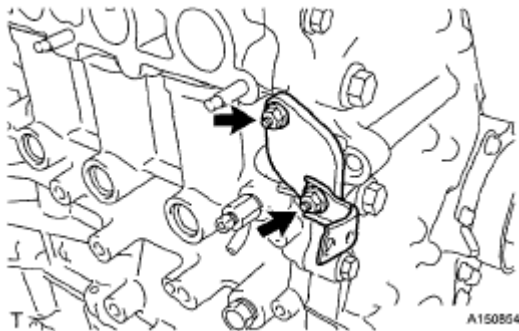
Locating No. 1 Chain Tensioner Assembly And Nut
